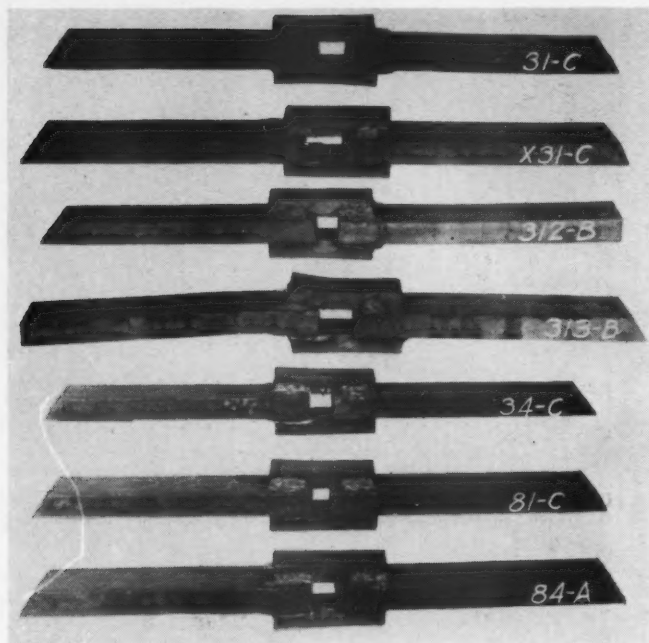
FILLET WELD TEST SPECIMENS.
